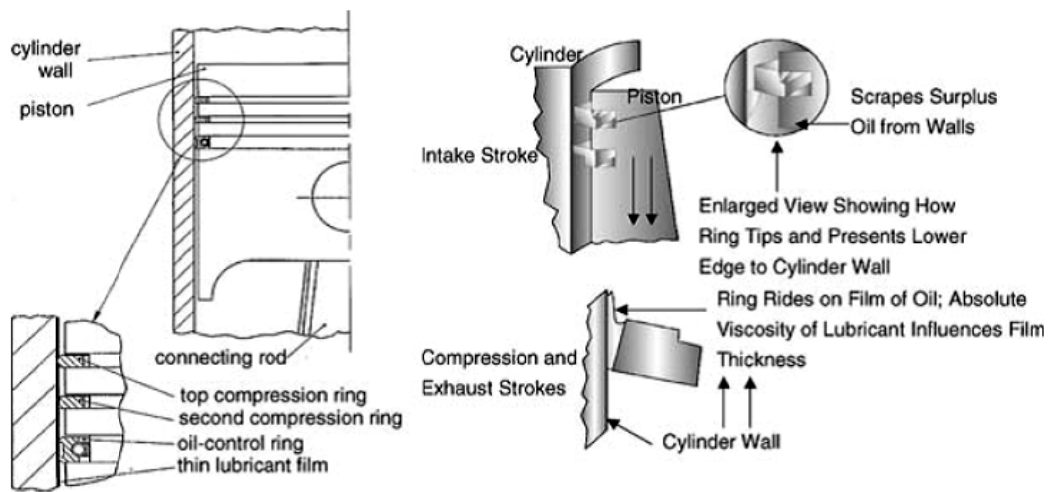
Piston assembly and piston ring function from an internal combustion engine [1].
